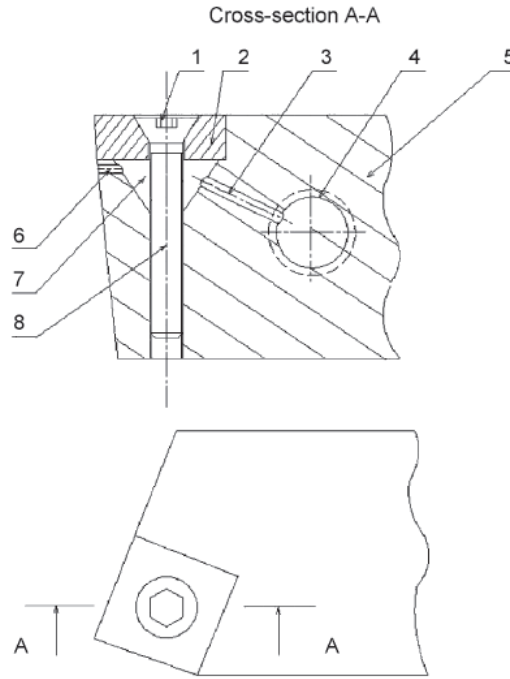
Schematic diagram showing a modified cutting tool for the cryogenic cooling system used by Kahn and Ahmed [41]. (1) Hexagonal slot of screw head, (2) Cutting insert, (3) A hole connecting LN₂ supply hole to the expanding chamber, (4) LN₂ supply hole (from storage tank), (5) Tool body, (6) A hole for releasing the expanded LN₂ in the chamber to the cutting zone, (7) Expanding chamber and (8) A threaded screw [41]
